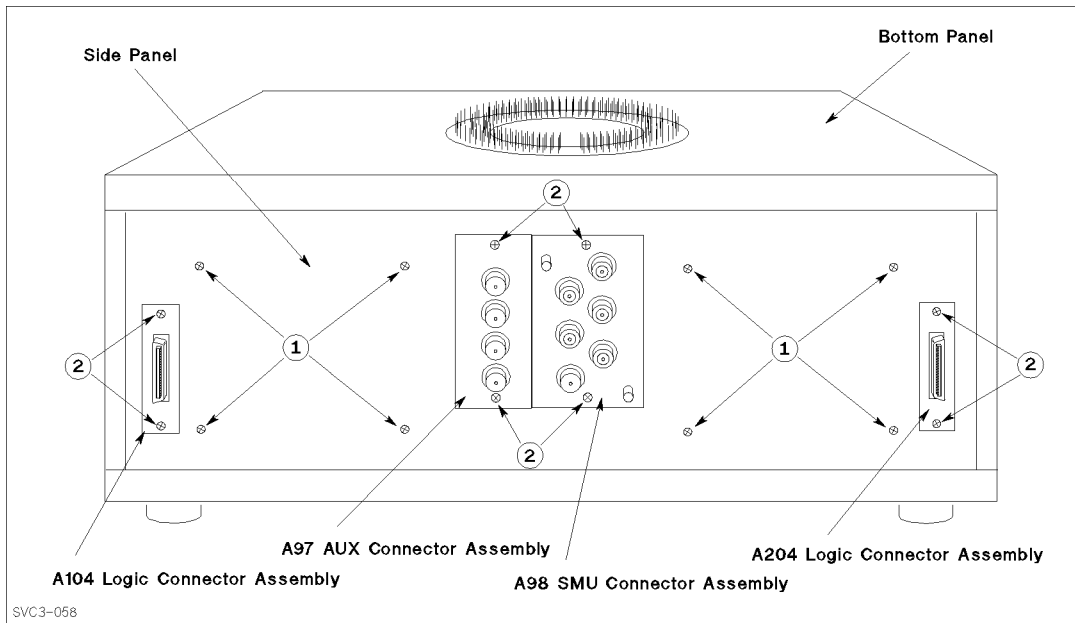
Removing Interface Boards of HP 4089A/B 96-pin SWM
